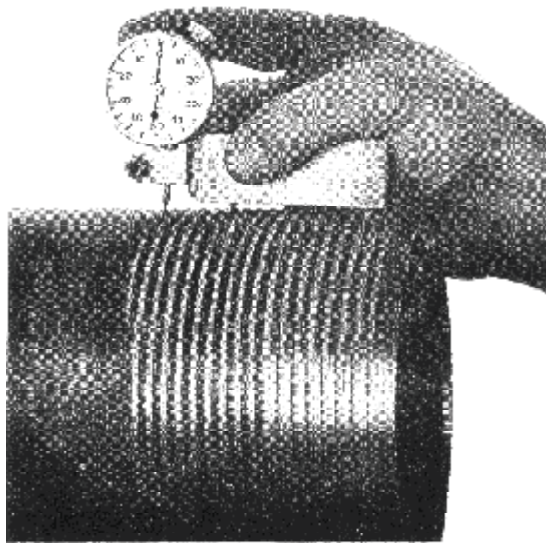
Typical Run-Out Gauge for Buttress Thread Casing
